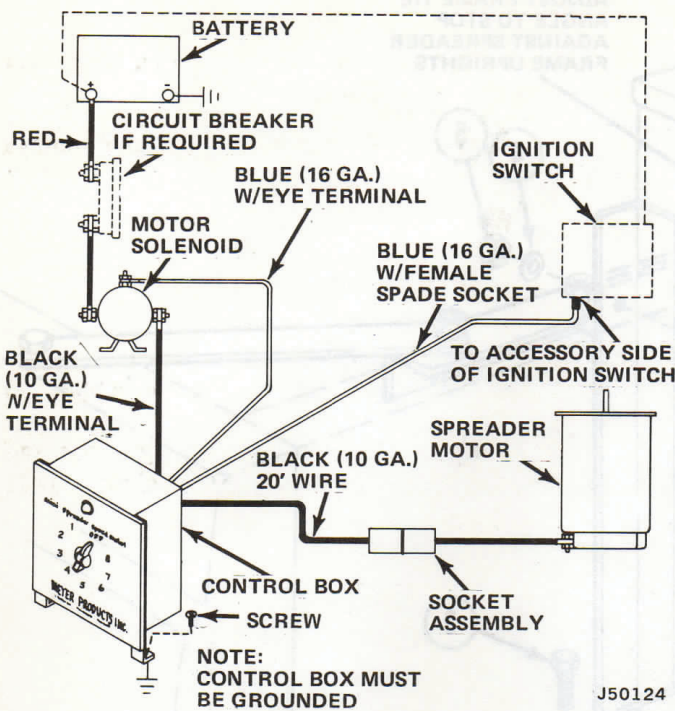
Electric Motor Variable Speed Control Box Wiring Diagram
